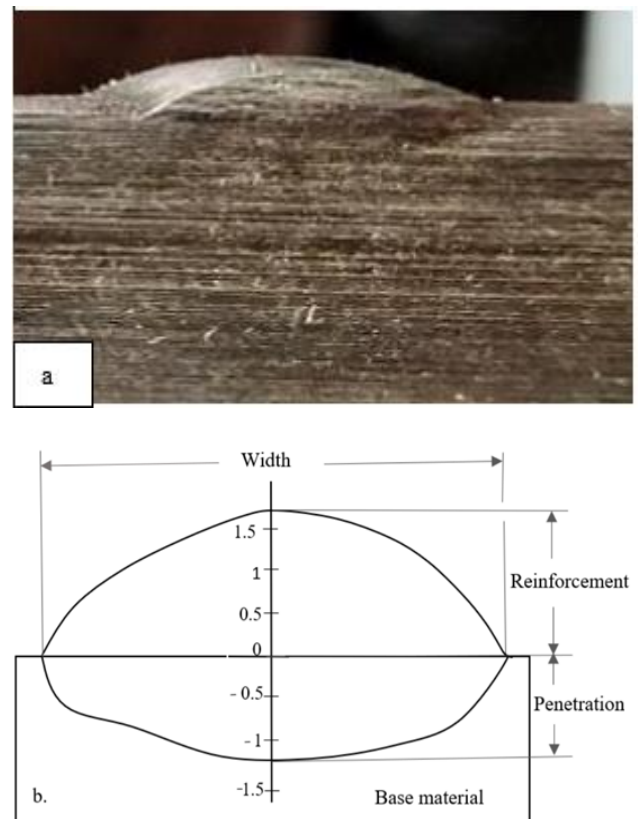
(a) Cross-section of weld geometry, (b) Location for hardness from the fusion line
